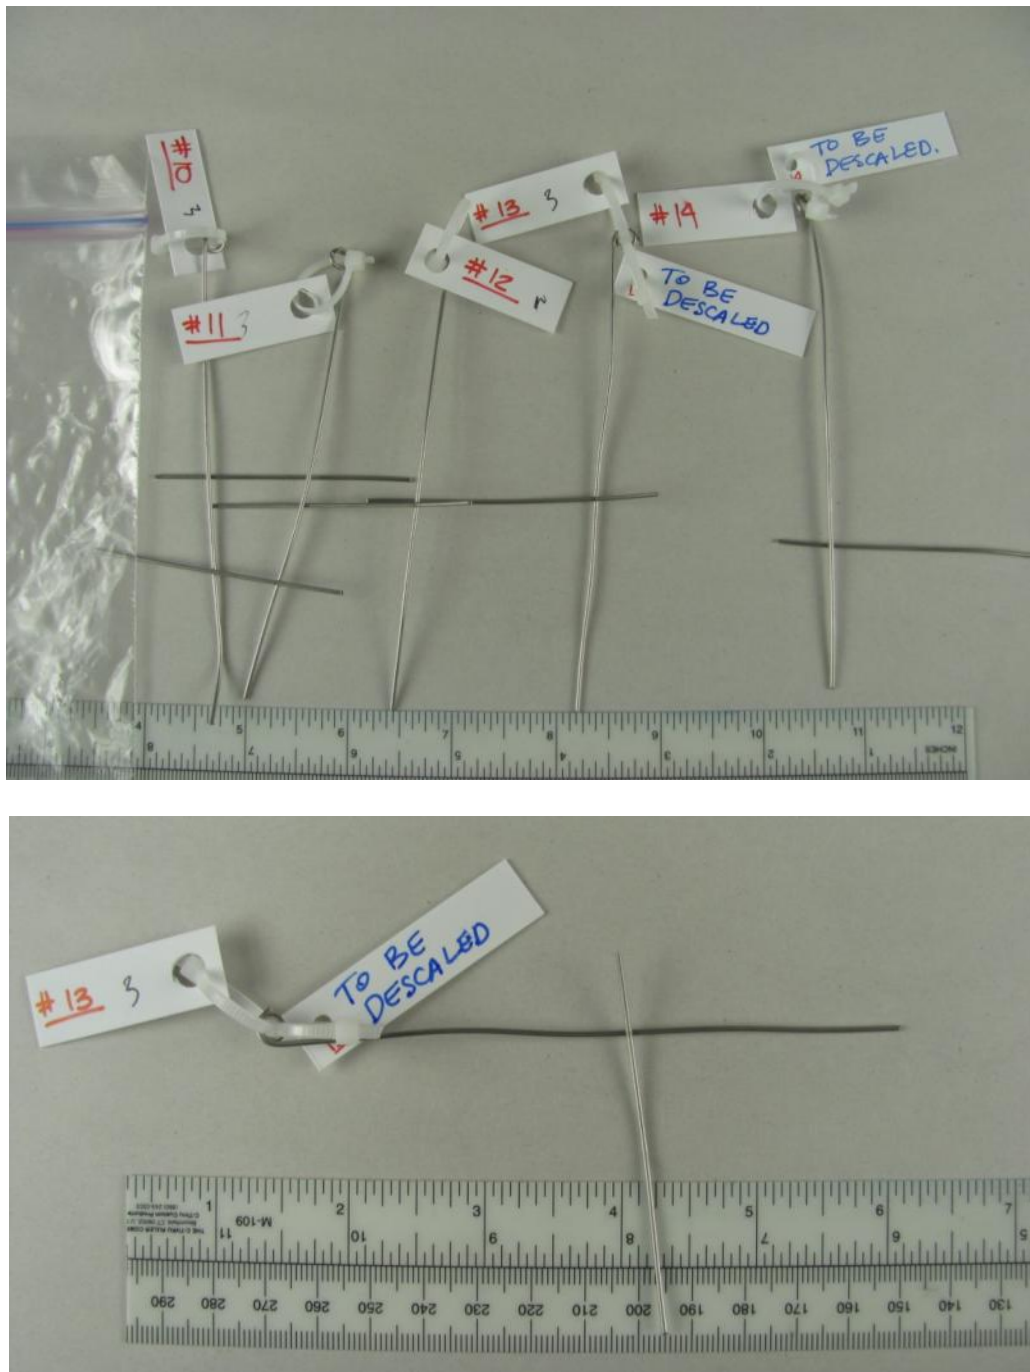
Macro photographs showing some of the as-received Type 317L solid wire weld samples and tags prior to descale / passivation and salt spray testing.
